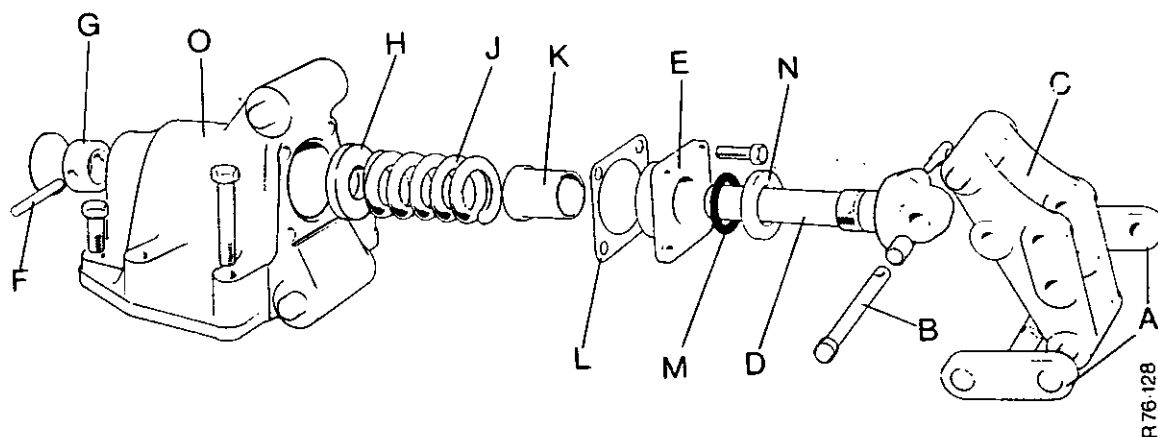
DISASSEMBLY OF THE ADJUSTABLE SENSING UNIT
